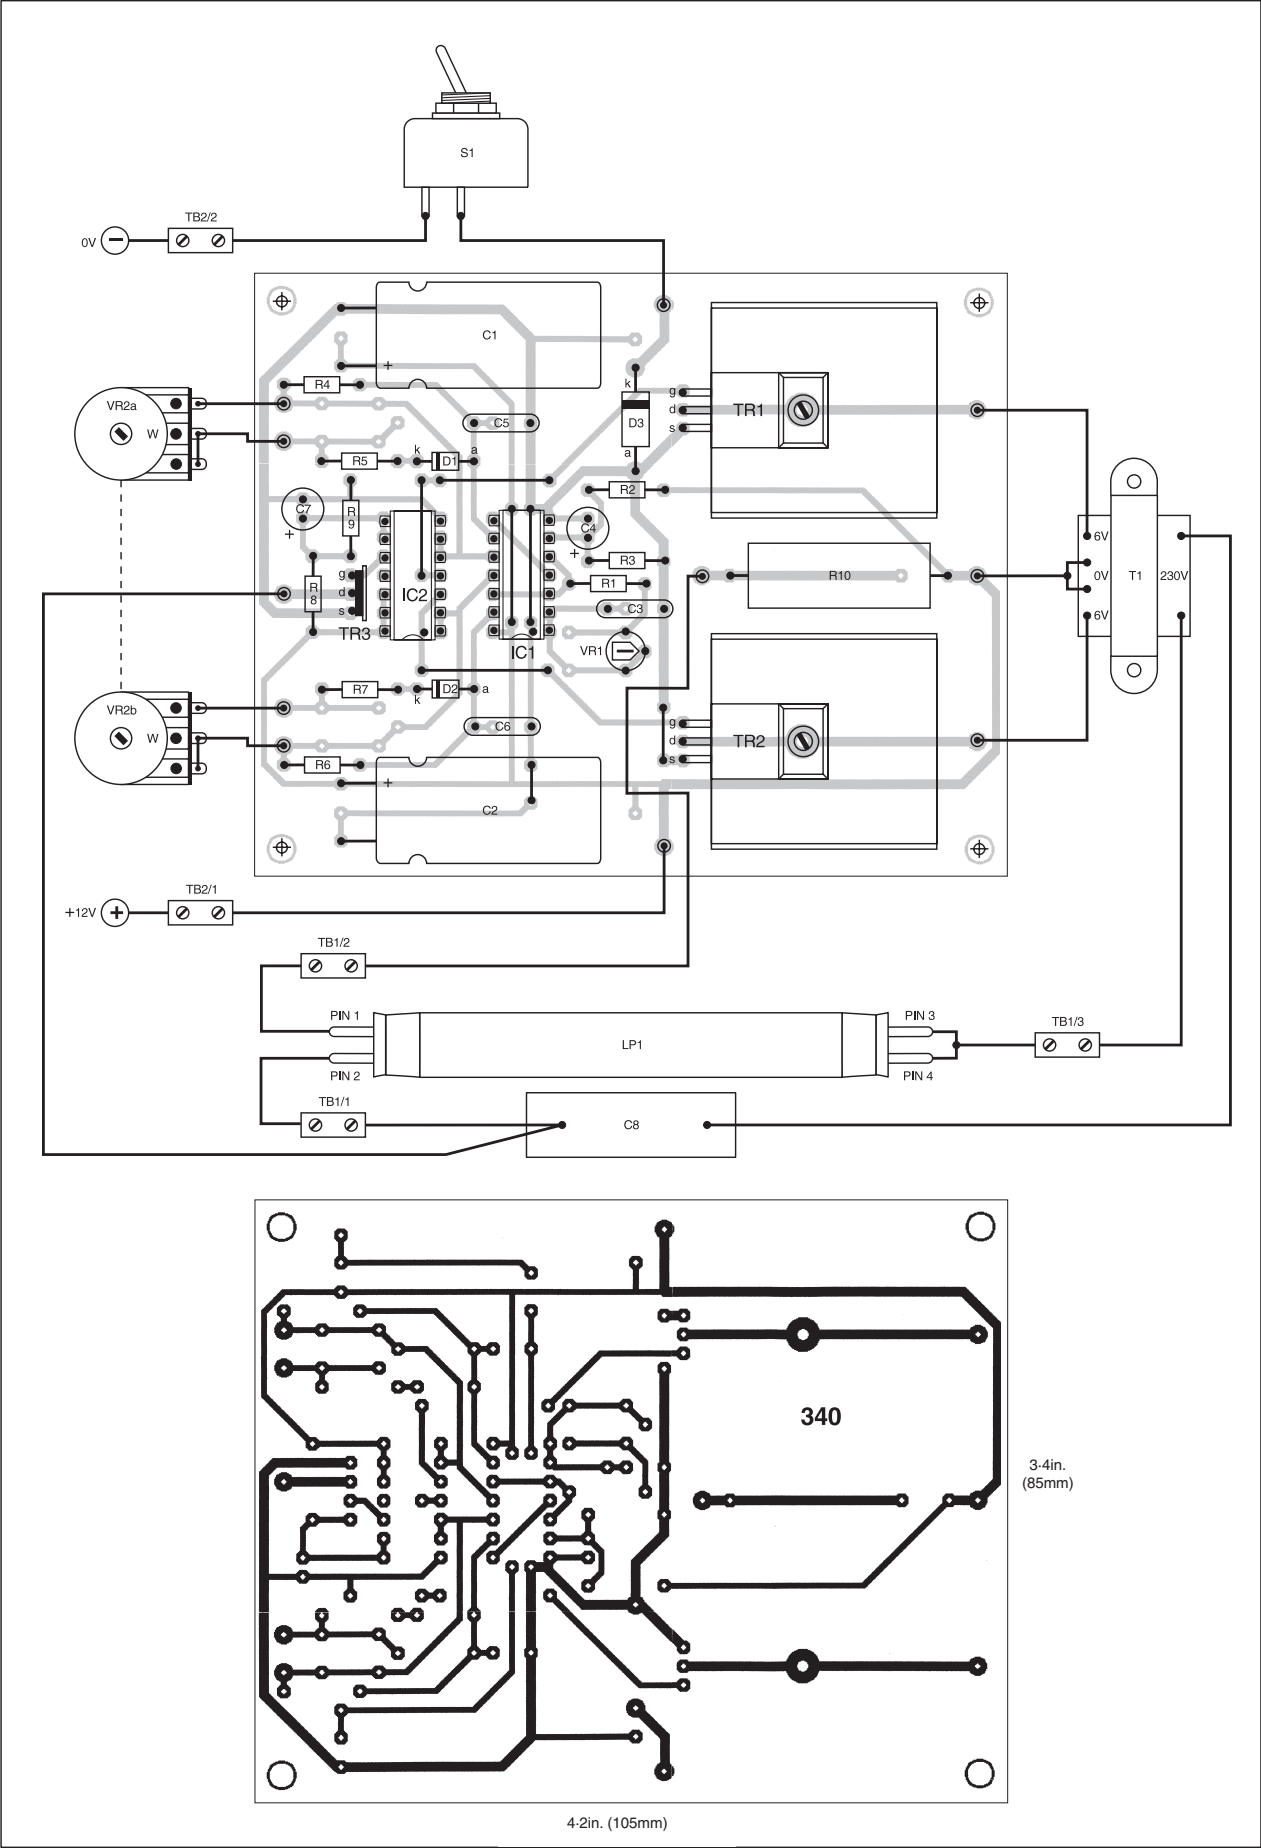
Printed circuit board component layout and off-board connection details, plus full size underside copper foil master track pattern.
